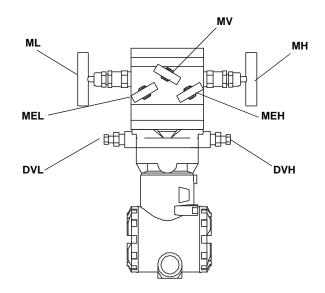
Valve Identification for Direct Mounted Models with 5-Valve Manifold
